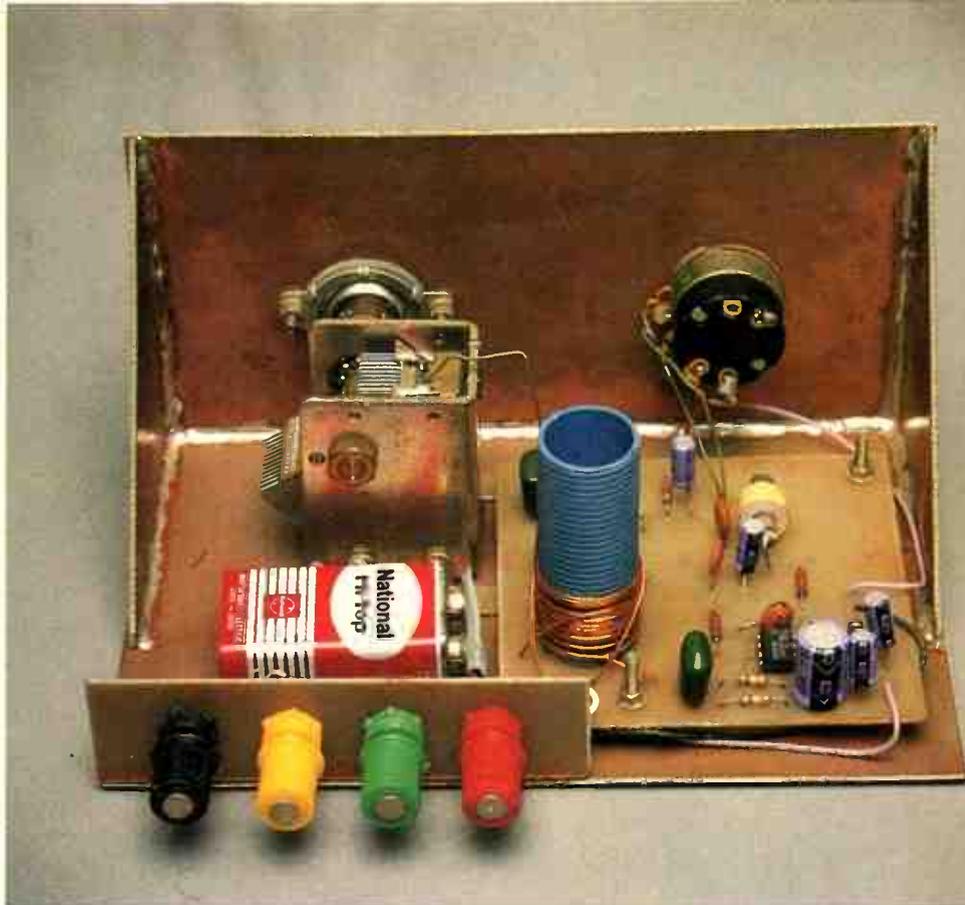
once the cabinet pieces are tacked together, a fillet of solder is run along each of the mating edges as shown here, making sure the iron tip heats both edges such that the tinning you put on initially liquifies. Touch the solder to the iron tip where it meets the two faces so that a liquid solder bead forms, then slowly run the iron along the joint.
